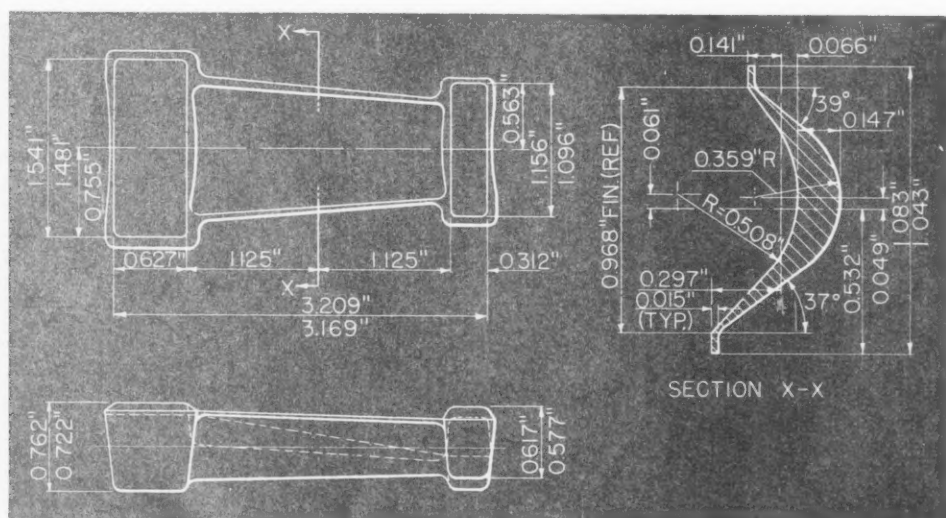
Simplified forging drawing of a turbine bucket. A complete drawing of this part contains ten cross-sectional views
